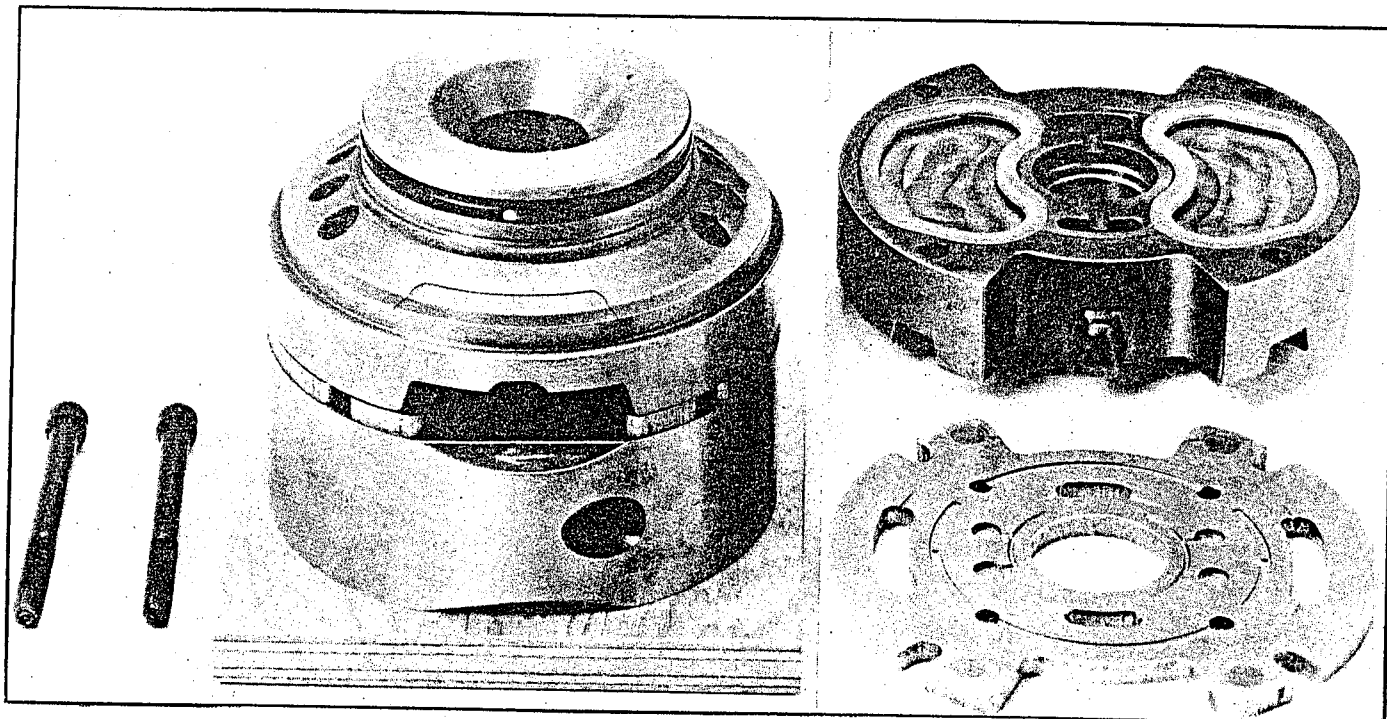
Reverse Cartridge, Use A Piece of Wood to Hold Ring, Rotor and Vanes
